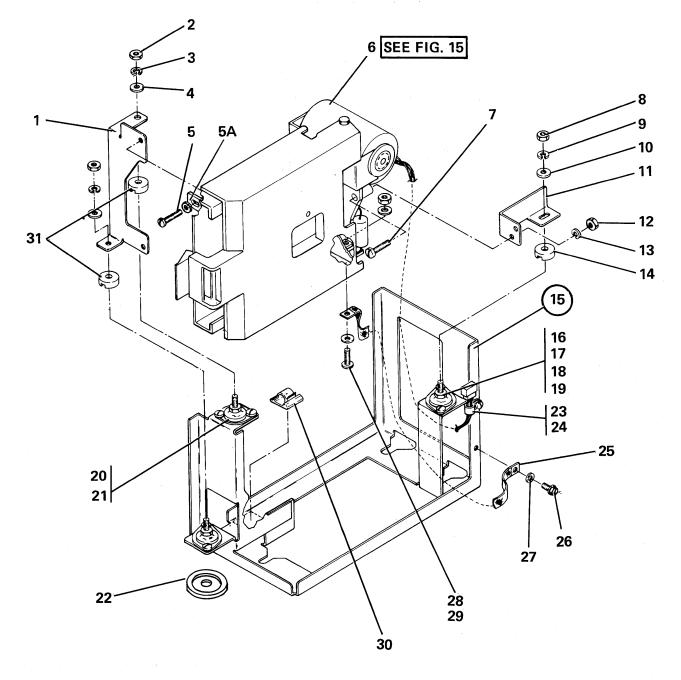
DISK DRIVE ASSEMBLY. SEE LIST 12.
